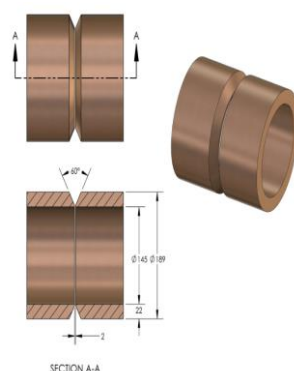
Typical dimension & groove geometry of each welding coupon
